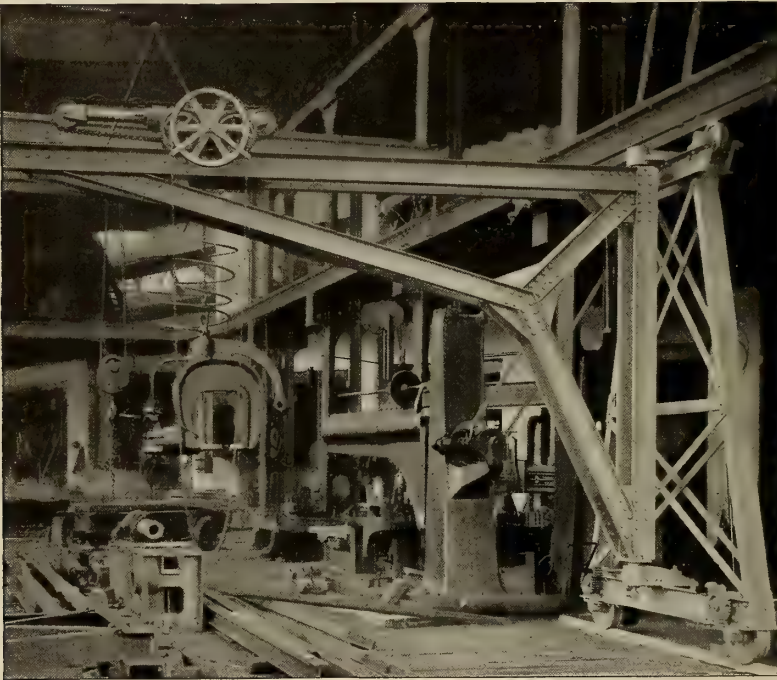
SINGLE-RAIL CRANE WITH HYDRAULIC LIFT AND PORTABLE HYDRAULIC RIVETING MACHINE, MADE BY MESSRS. HENRY BERRY & CO., LEEDS.
